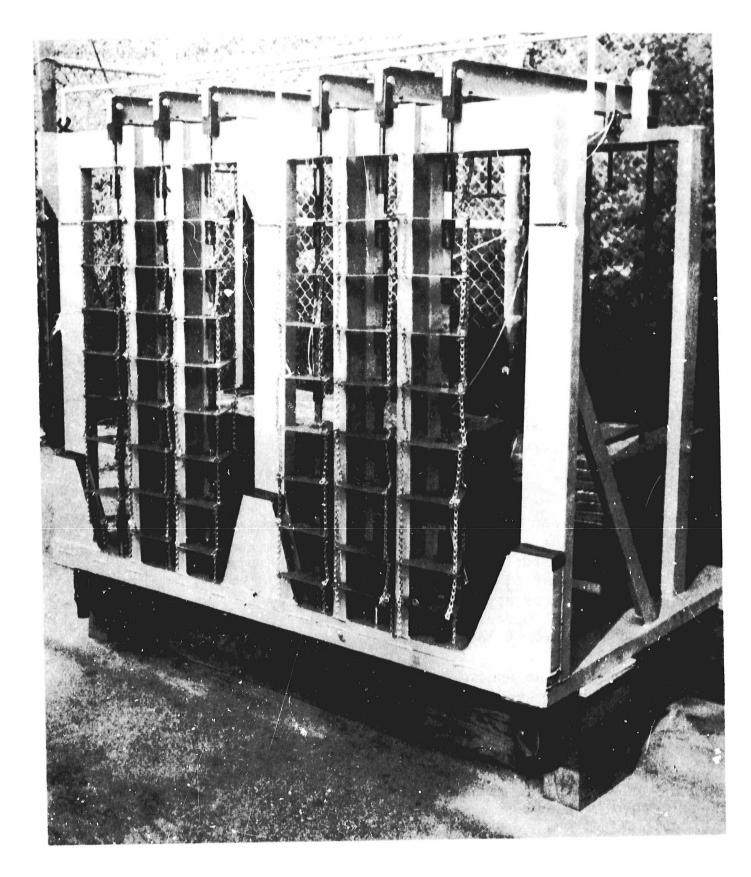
LOADING FIXTURE FOR SEACOAST STRESS-CORROSION TESTS
